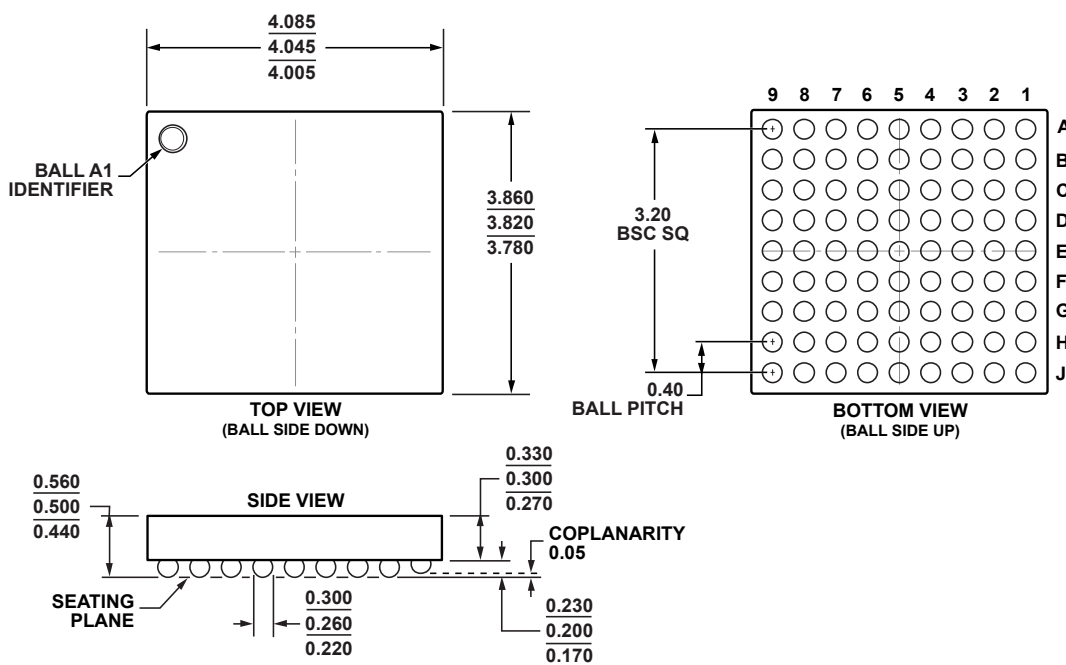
81-Ball Wafer Level Chip Scale Package [WLCSP] (CB-81-1)
